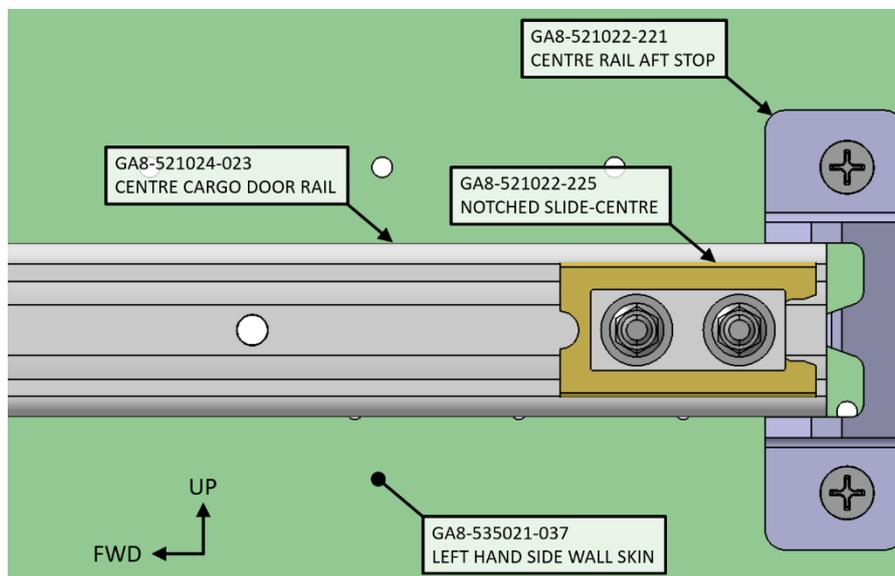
Correct orientation of the Forward Cargo Door Guide Assembly. View looking at the exterior surface of the aircraft's port side fuselage wall.
